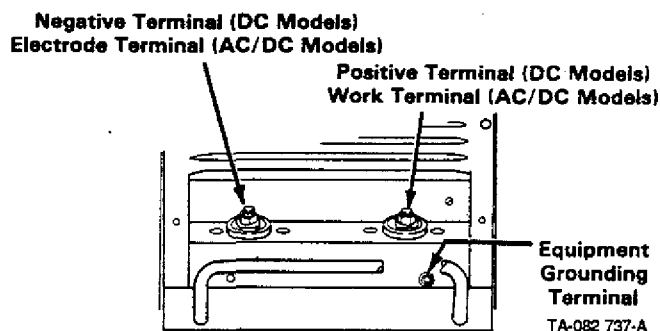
Equipment Grounding And Weld Output Terminals
